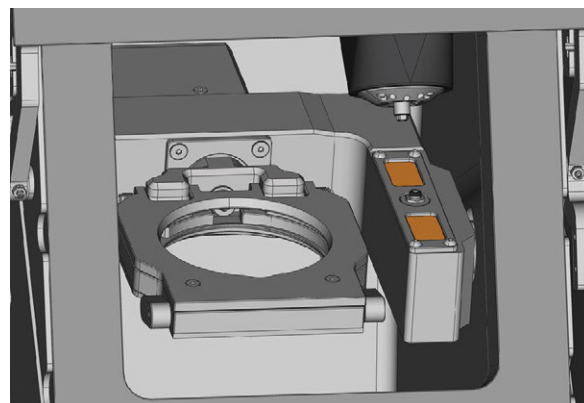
TOOL MAGAZINE IN THE WORKING CHAMBER (MARKED ORANGE)
